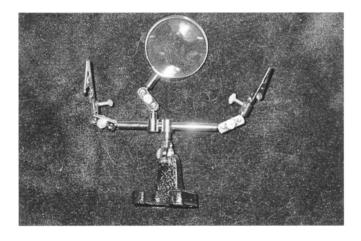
These helping hands cost around ten dollars and are useful when you have a lot of soldering to do. Parts are securely held in place, leaving your hands free to hold a soldering iron, solder, and other parts.
